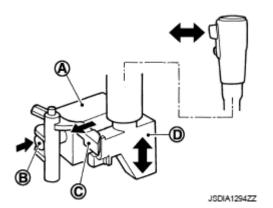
Identifying Shift Lock Solenoid, Solenoid Rod And Connecting Lock Lever Courtesy of NISSAN MOTOR CO., U.S.A.
